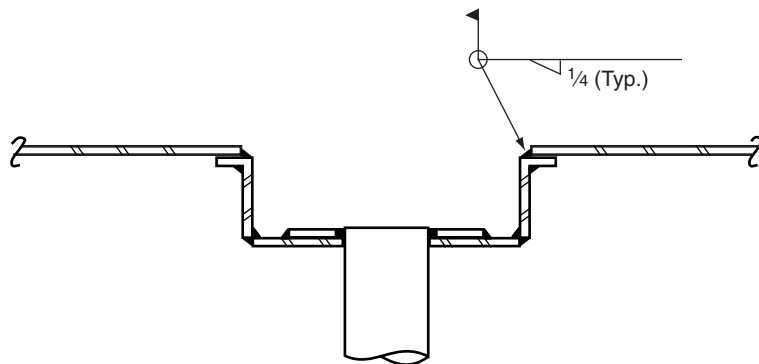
Recessed inlet-outlet pipe bottom connection detail
